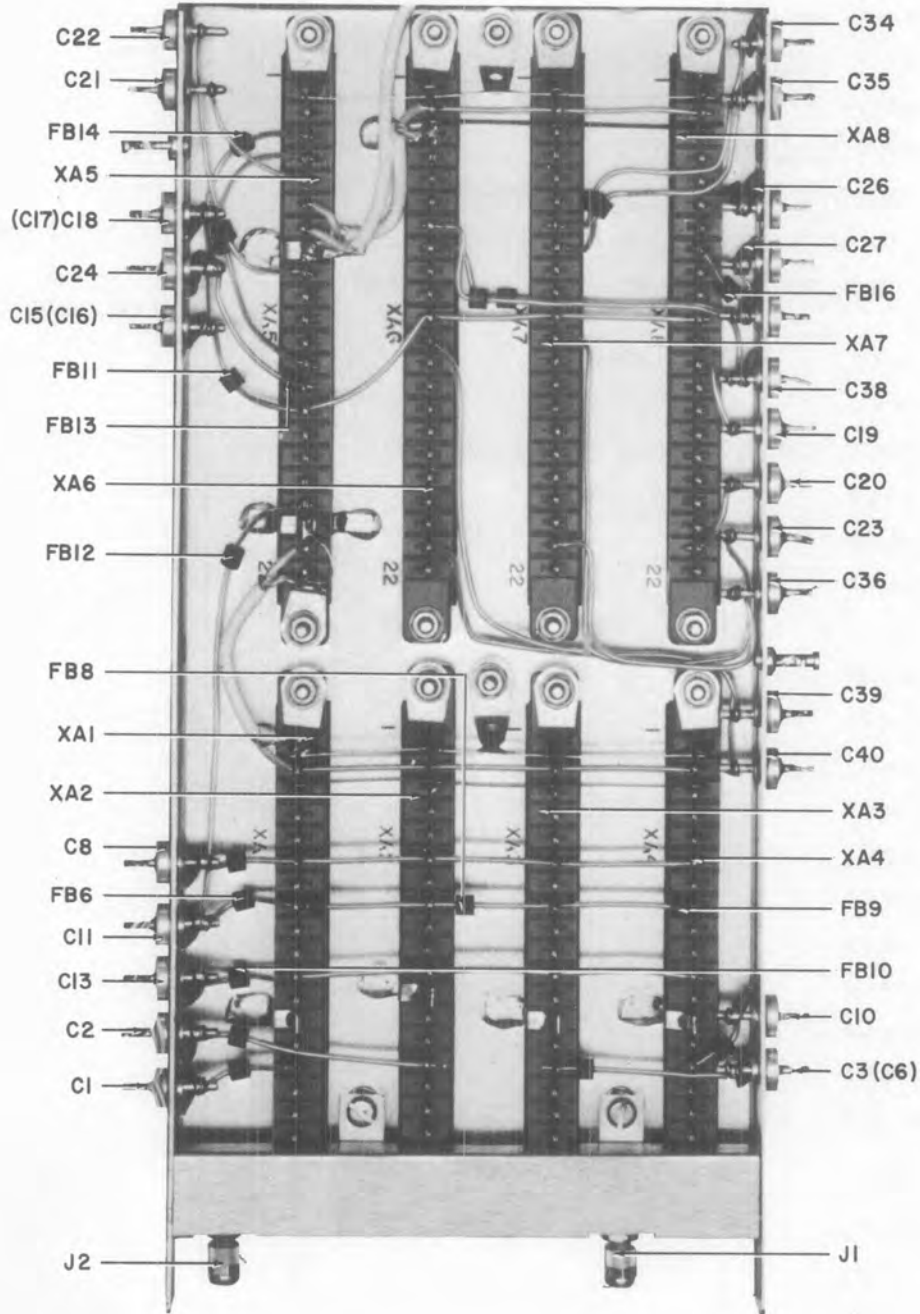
Type 72346 IF Amplifier Assembly (A2), Bottom View, Component Locations
